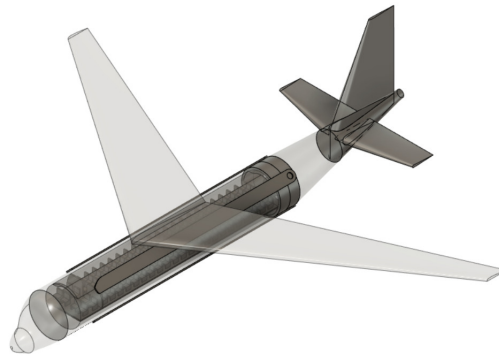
Three dimensional view highlighting the active aeroplane parts of the Auto-rotation mechanism
